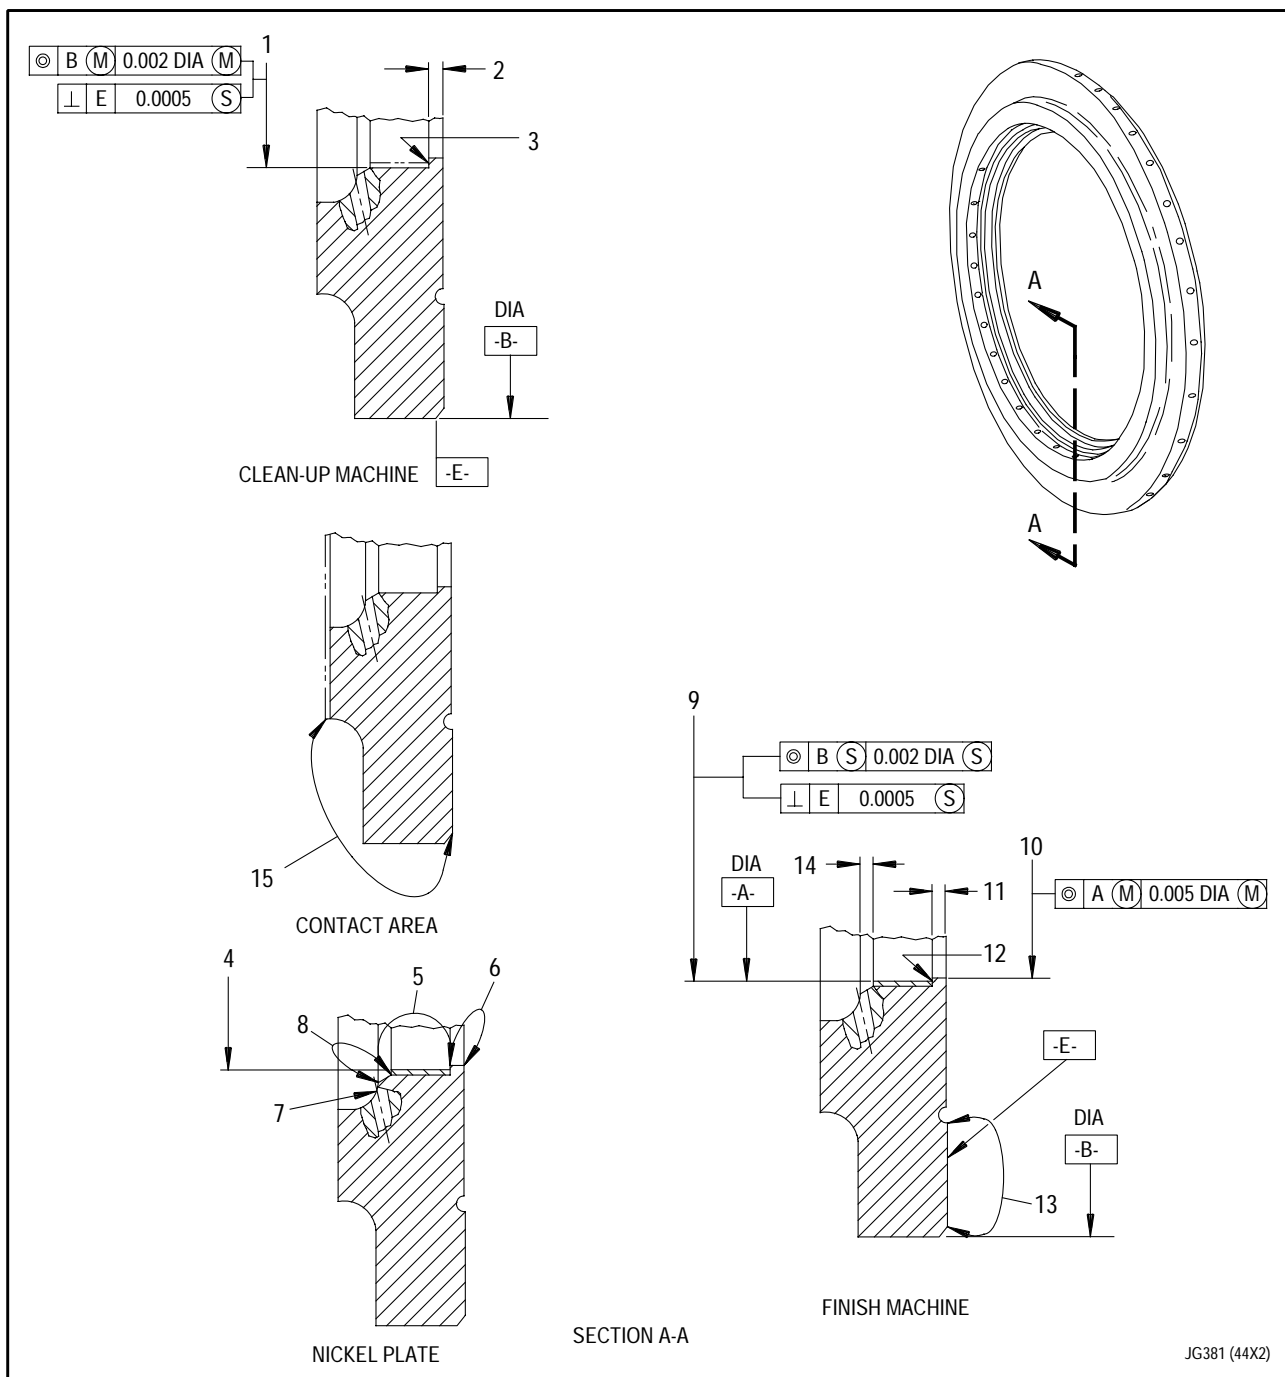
No. 2 Bearing Rear Seal Seat - Nickel Plate Repair of Inside Diameter
